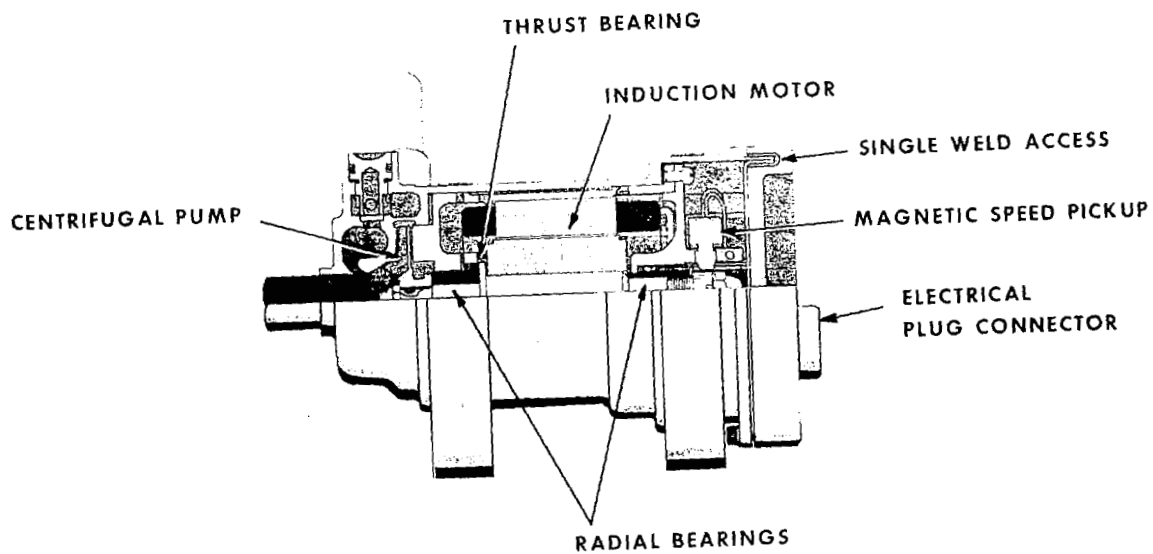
Lubricant-Coolant Pump Cutaway View
